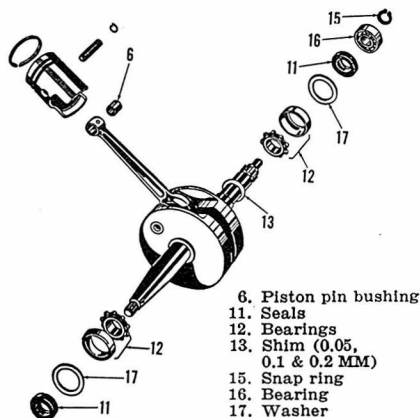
Crankshaft, bearings and piston typical of all models. Crankshaft and connecting rod are available only as a complete unit.
